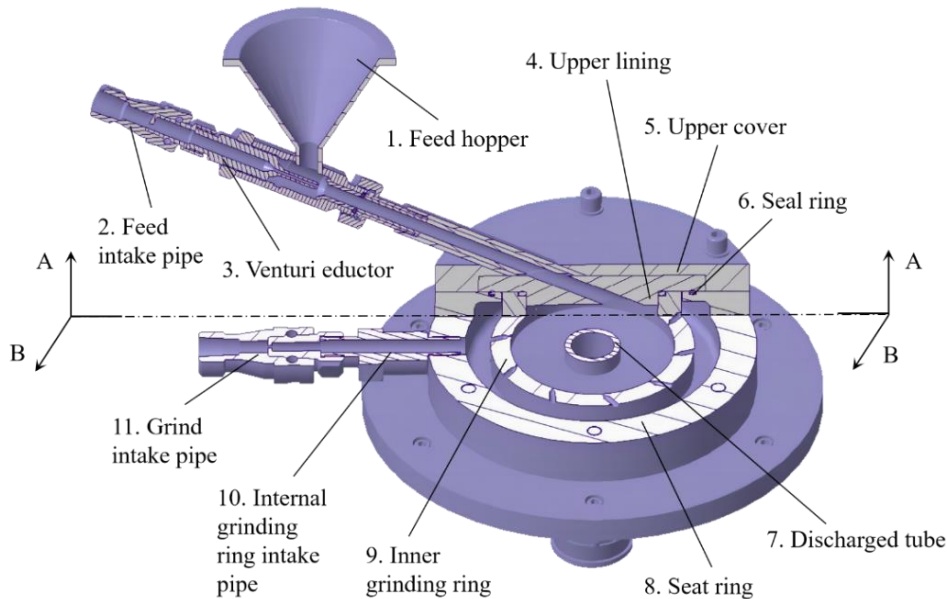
In-house made CAD drawing of GQF-3 jet mill
